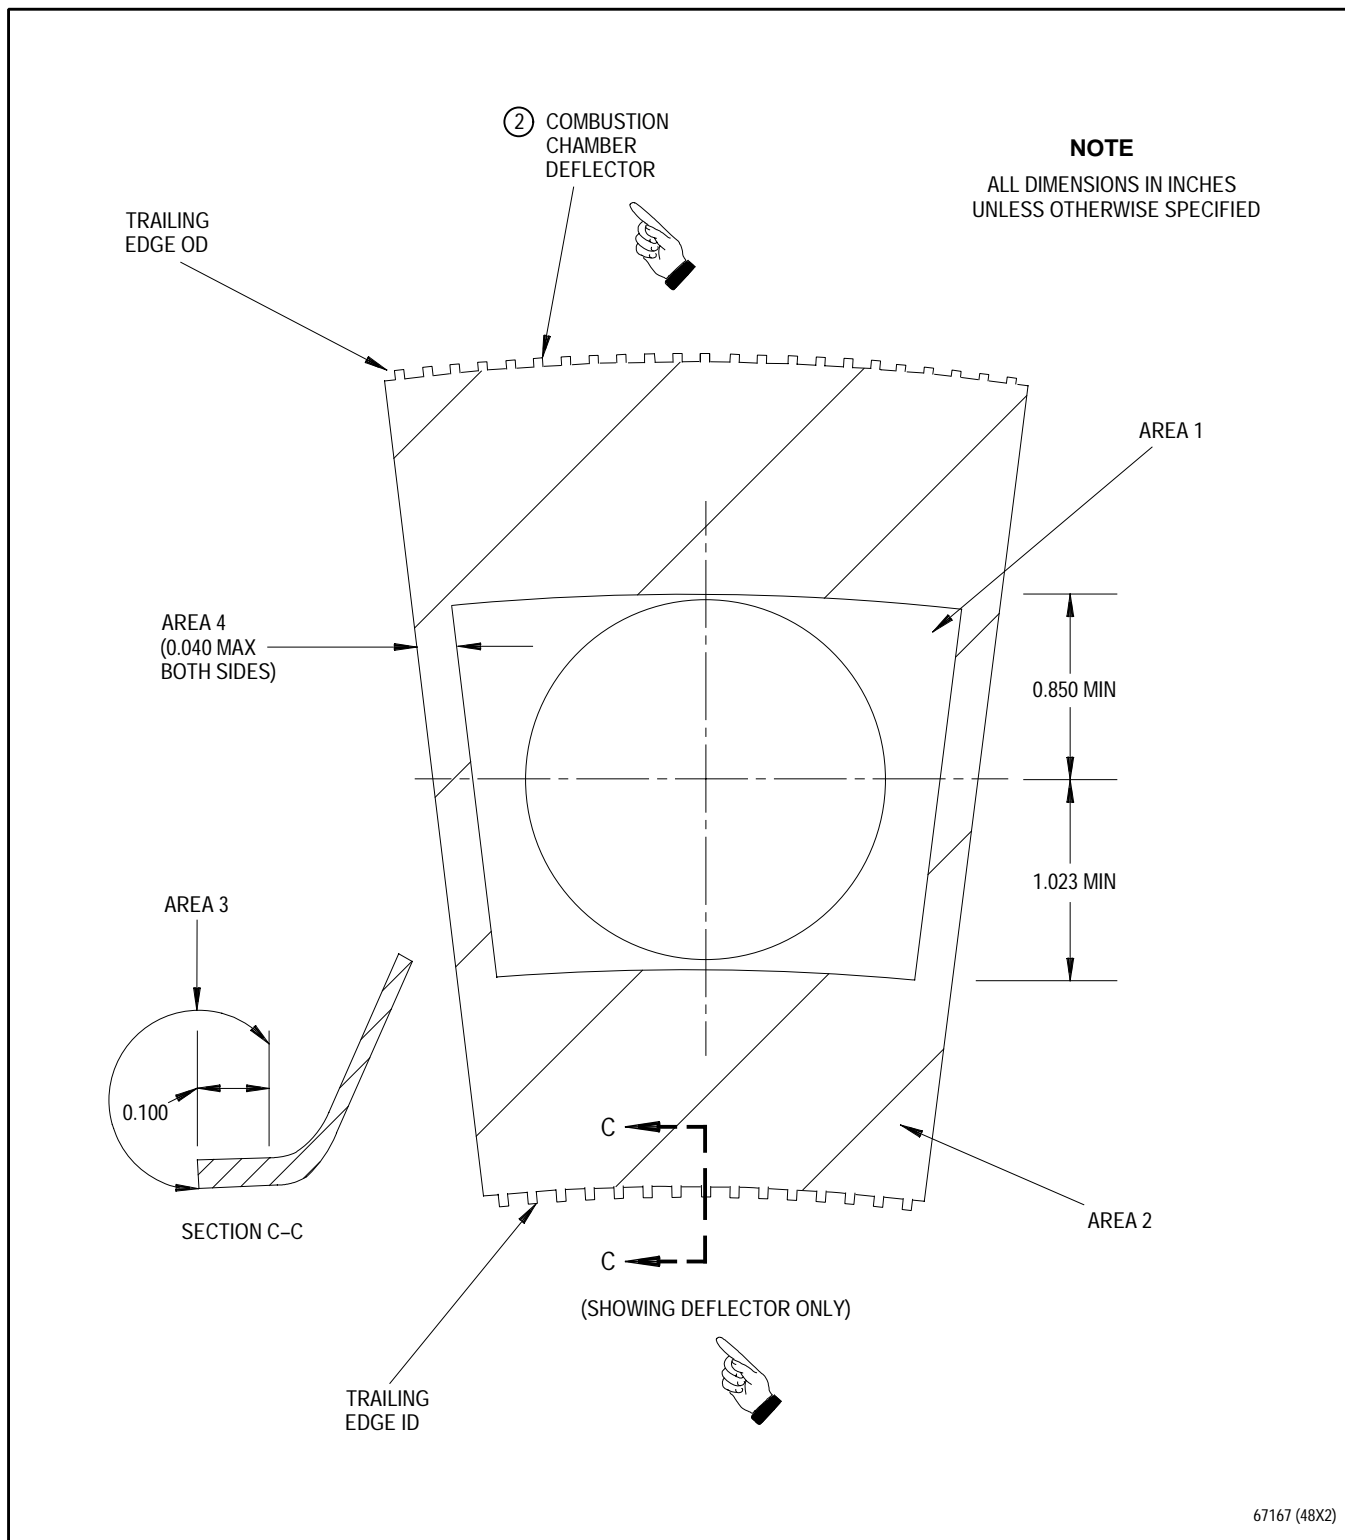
Combustion Chamber Assembly - Inspection (Sheet 4 of 7)
